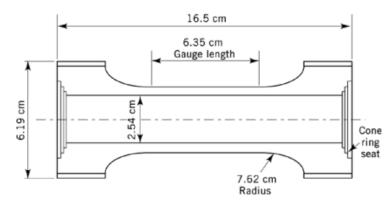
2.54 cm (1 in.) bore diameter fatigue test specimen (84).
